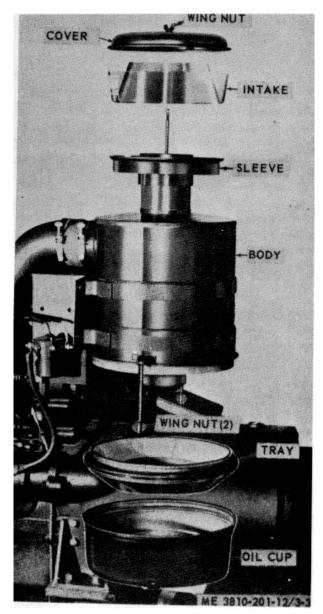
Air cleaner service (model 855BG) (engine 687C-18-ES).
